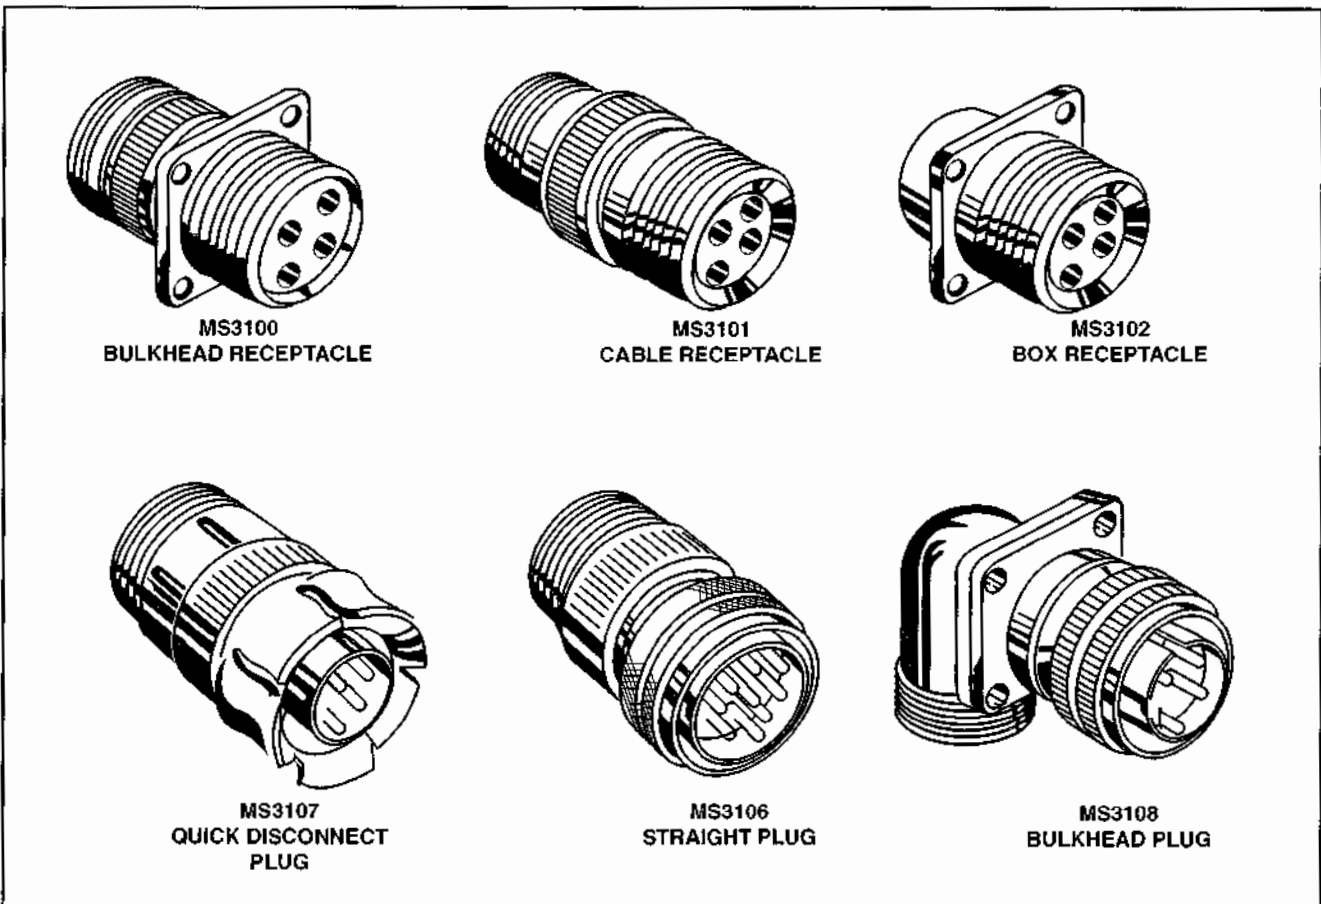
Electrical connectors come in many types and sizes to provide a number of options when attaching electrical wiring to various components.
